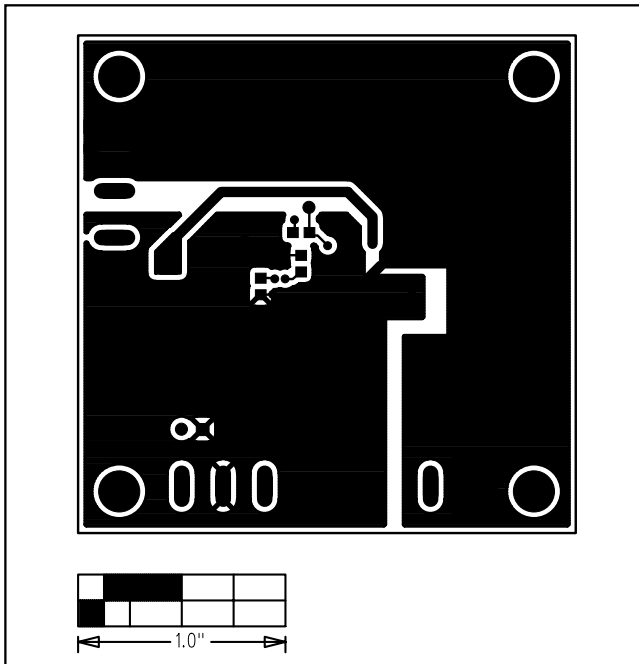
MAX1873 EV Kit PC Board Layout—Solder Side
